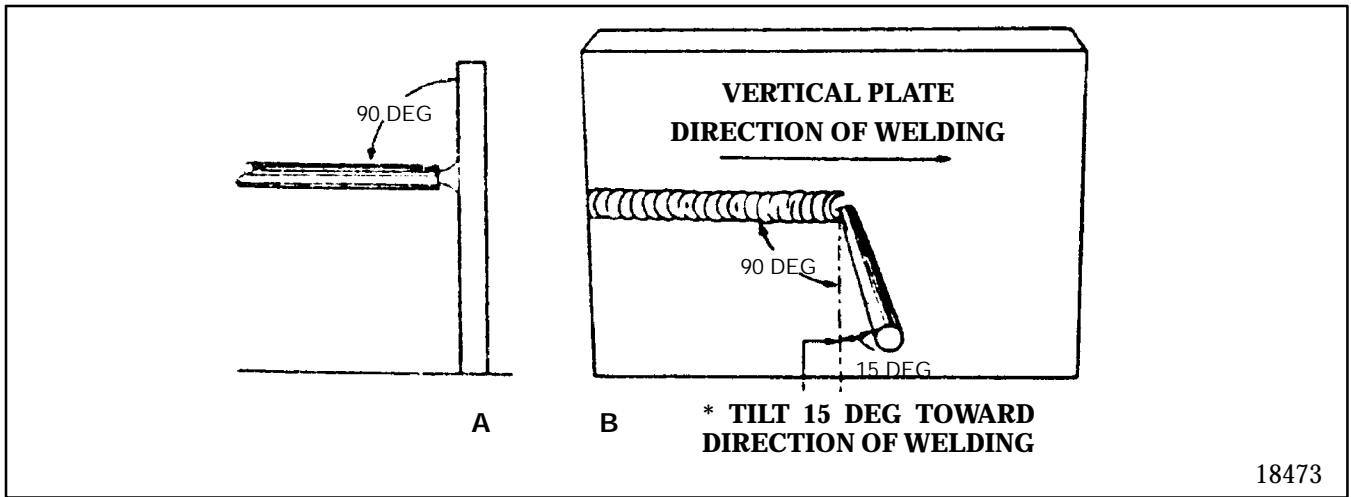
Vertical Position Welding with Bead in Horizontal Position
